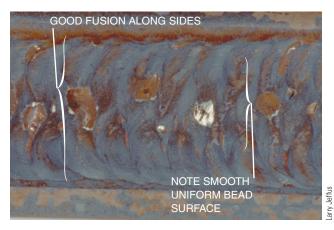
Weld bead made with GMAW axial spray metal transfer.
